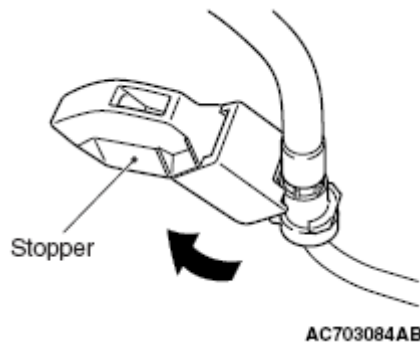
Removing Stopper Of Fuel High-Pressure Hose
